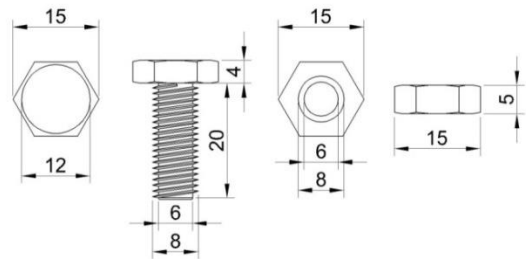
Hexagon head M8 bolt and nut (mm)
